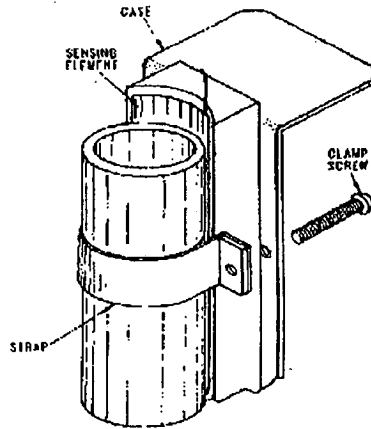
Skeleton view of control case, temperature sensing element, and mounting strap.
